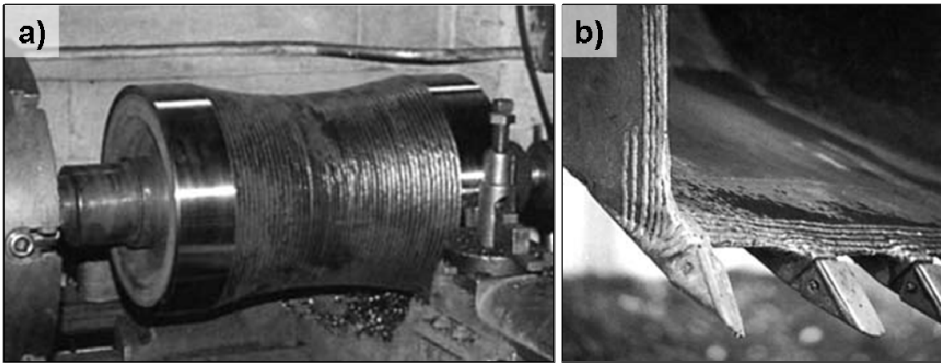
Examples of application: a) steel mill roll rebuilt to original dimensions (build-up); b) bucket lip hard surface as preventive maintenance (overlay) [10]
